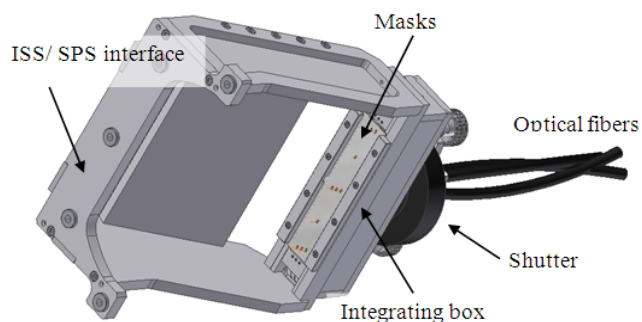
Mechanical drawing of SPS Illumination Unit without Calibration Tool.
